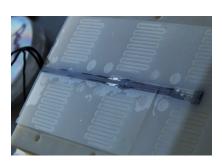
Bonding failure caused by to low tolerances for the included parts
